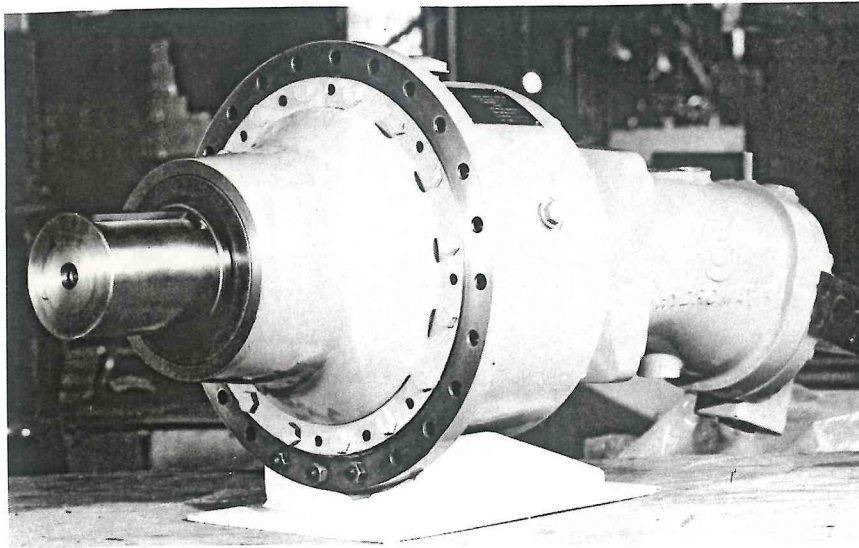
Flange-mounted gear unit. (Courtesy of American Lohmann Corporation, Hillside, N.J.)
